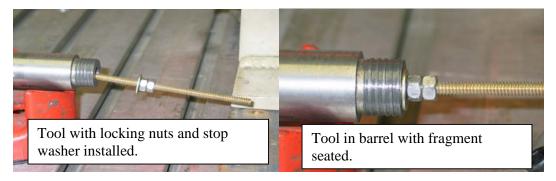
Seating tool used to precisely seat FSP projectile in gun barrel
